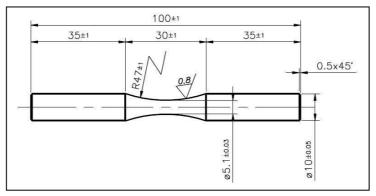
Specimens for axial fatigue test (ASTM E 466)
